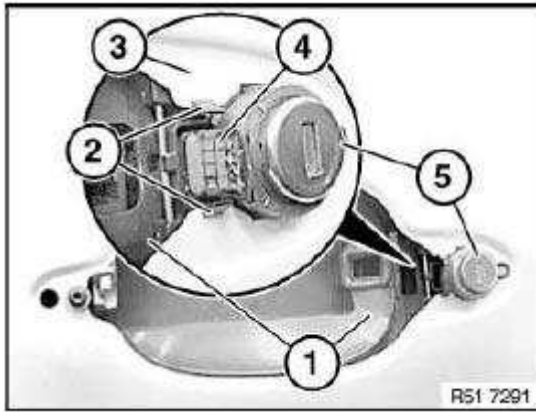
Catches, Carrier, Lock Cylinder And Door Outer Skin
